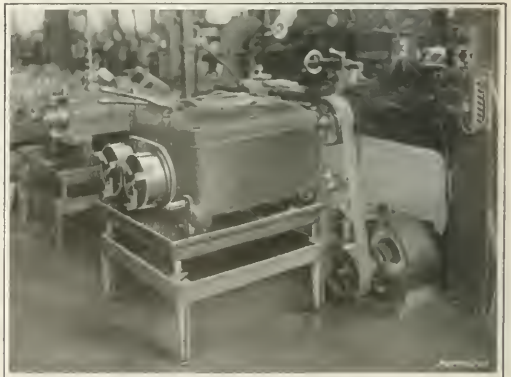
Stand located by Cleats on Floor to align Headstock and Motor
